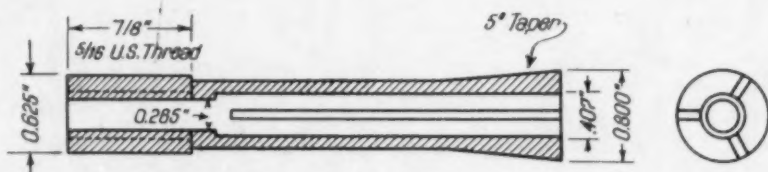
Diagrammatic Representation of Modified Grip for the Farmer Fatigue Testing Machine.
